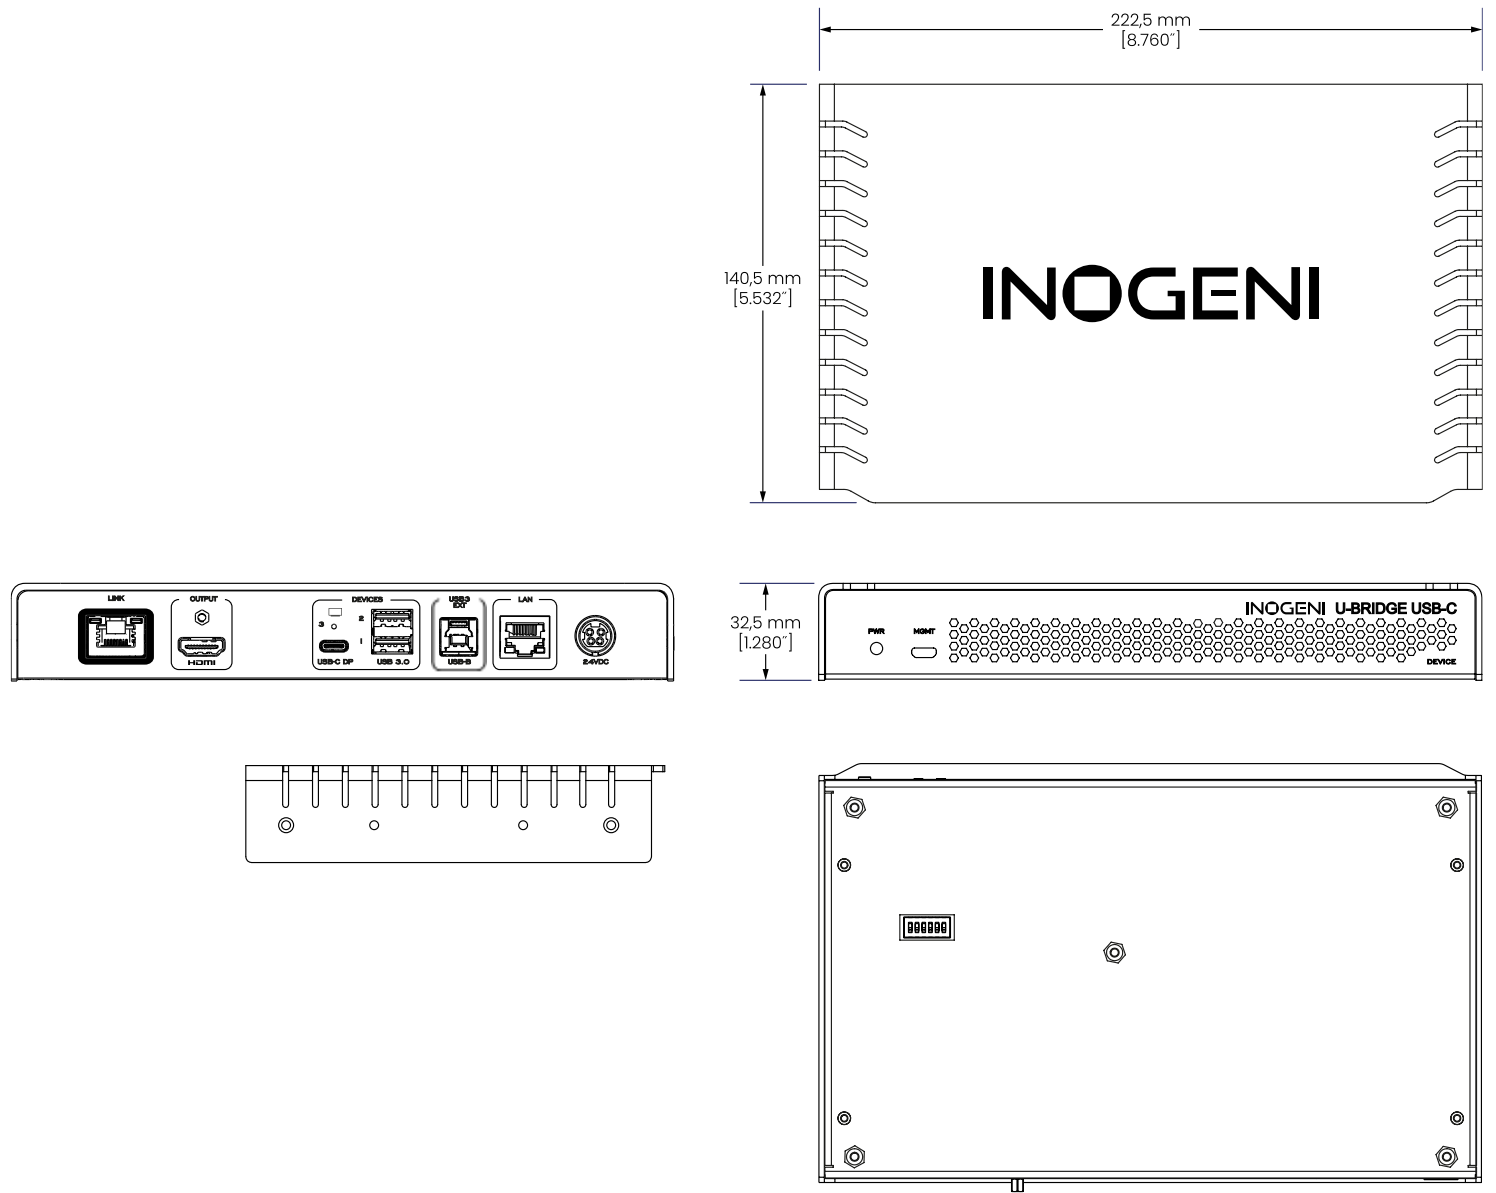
Bottom plate dimensions and holes positions of DEVICE hub – SINGLE variant
